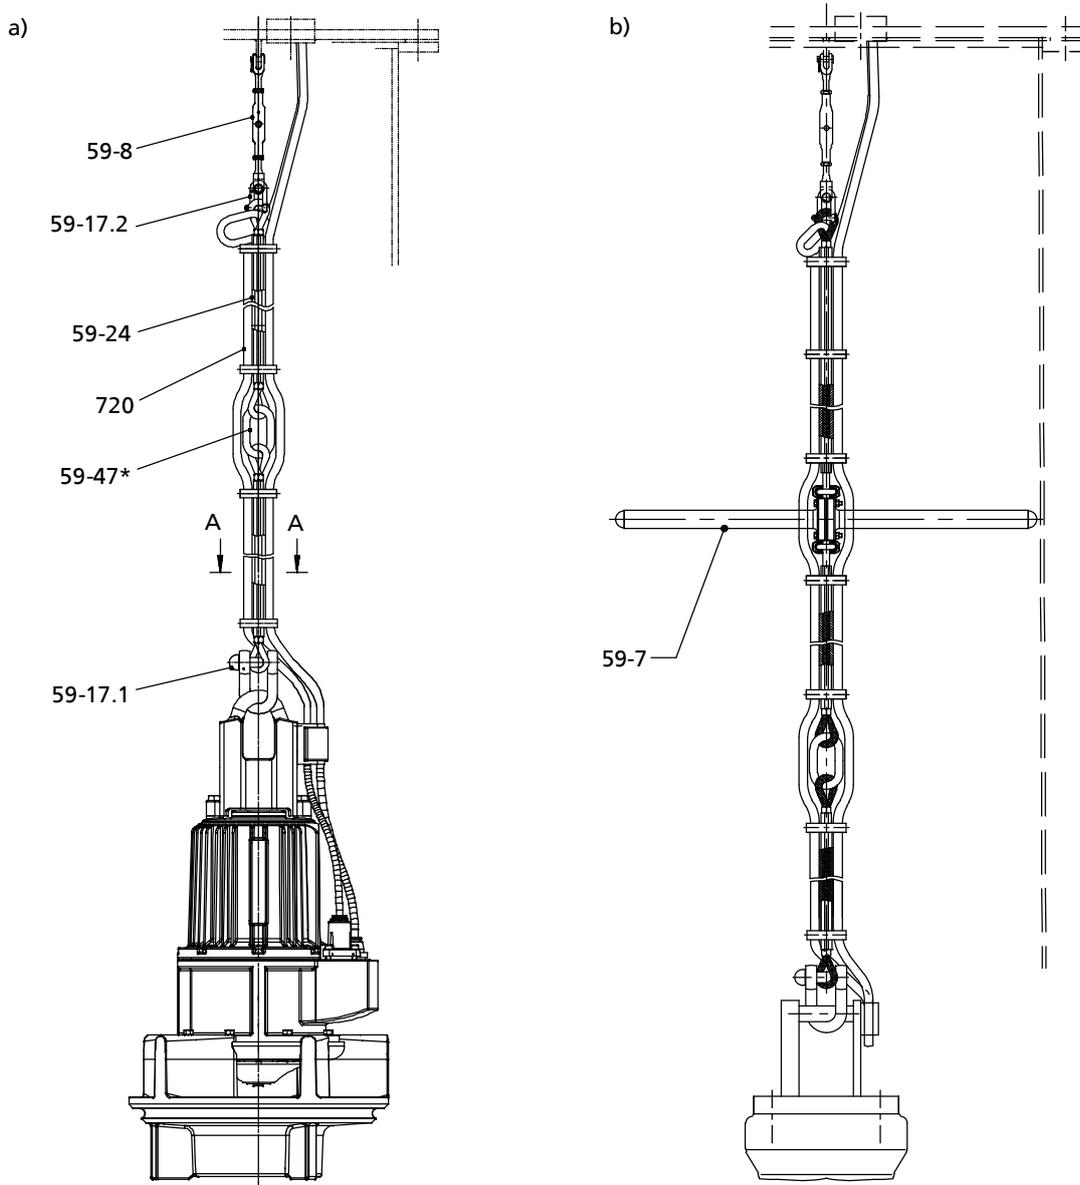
a) Pump set with support rope and turnbuckle in the discharge tube b) Pump set with support rope and turnbuckle in the discharge tube, with support spacer for large installation depths
